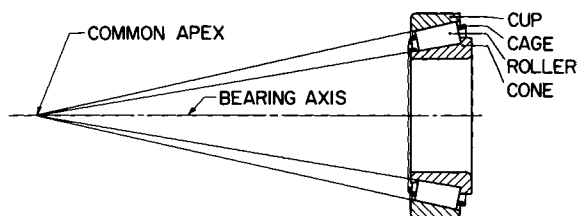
Basic principle of a tapered-roller bearing with nomenclature. (The Timken Company.)
